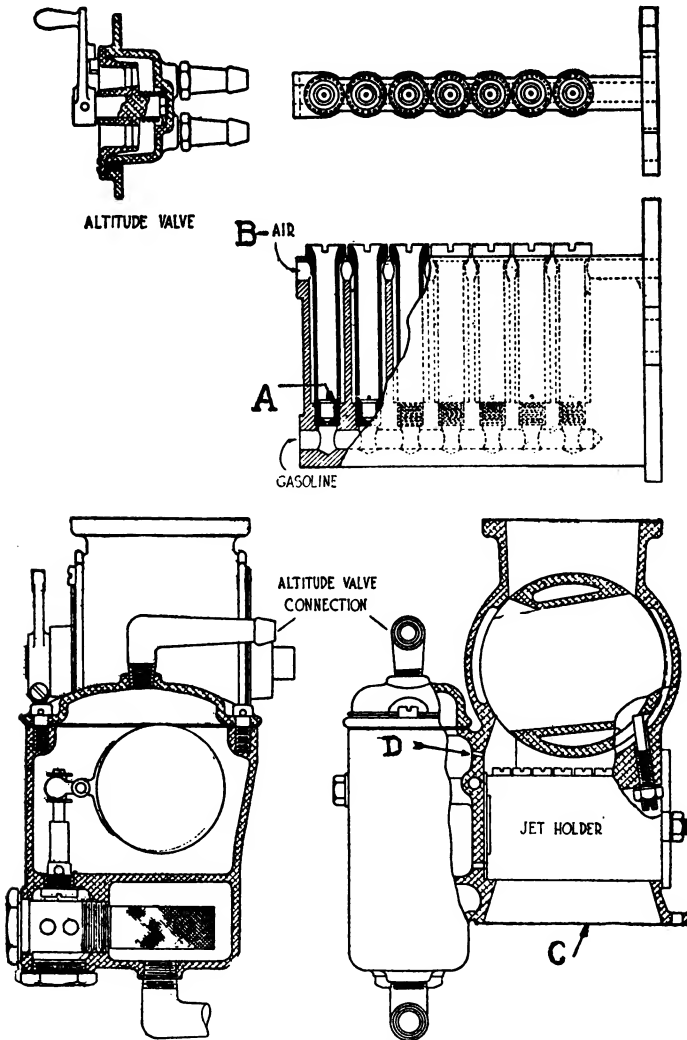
Miller Multi-Jet Carburetor and Altitude Valve Details
